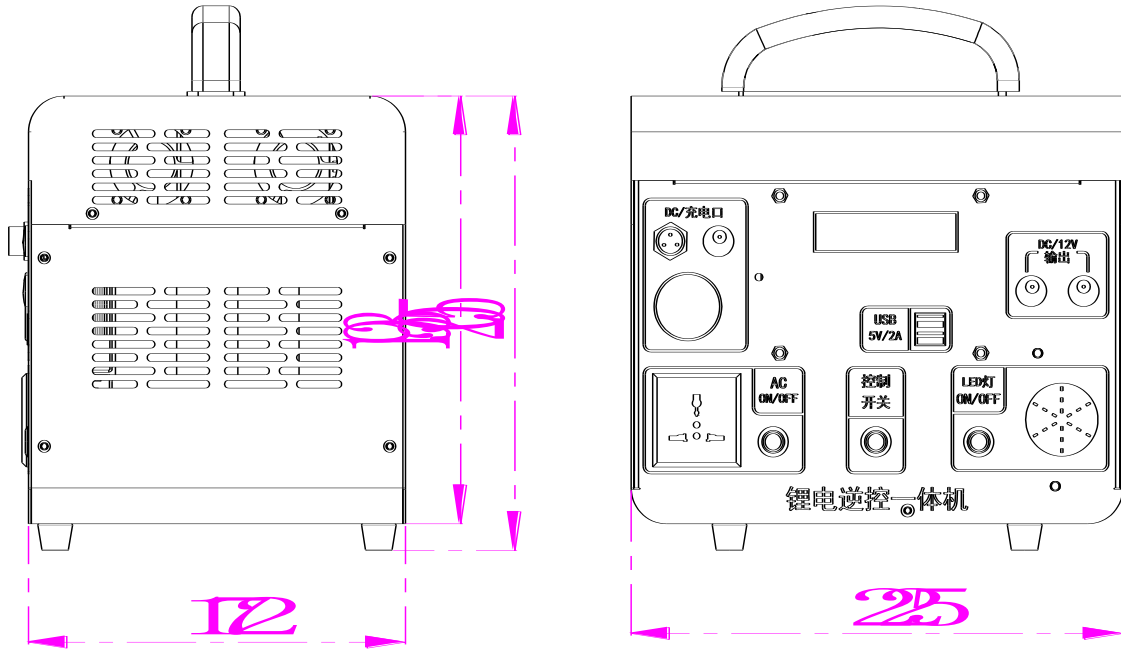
Installation dimensions of SG-BX300W / 500W-55AH Lithium battery integrated machine
